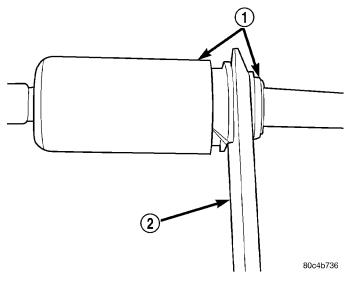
Disconnect Clutch Hydraulic Quick Connect using Tool 6638A
